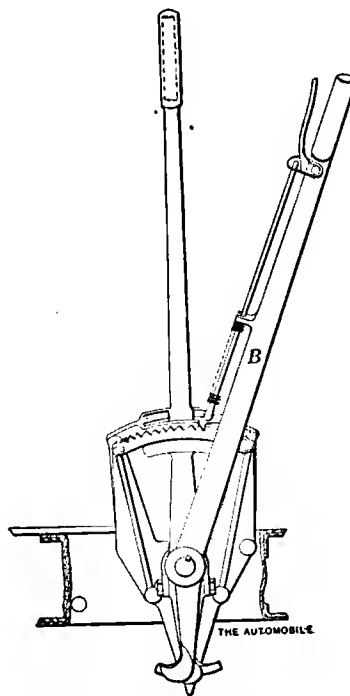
SIDE VIEW OF CHANGE-SPEED AND BRAKE LEVERS.
